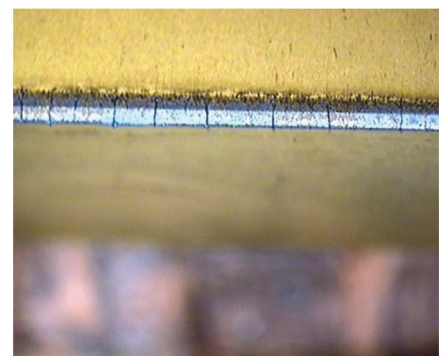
Wear - cutting edge heat cracks [7]
